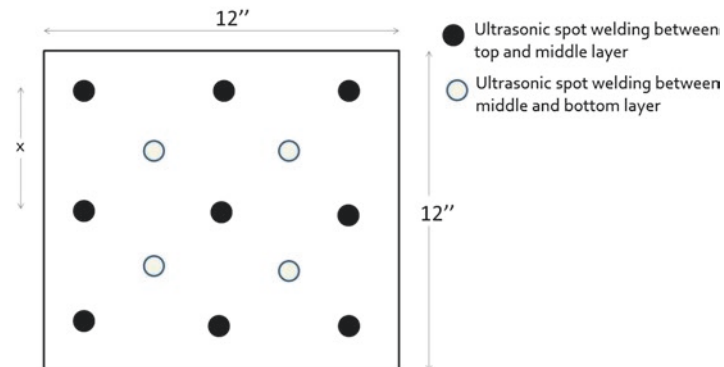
Ultrasonic spot weld placement for sandwich structure fabrication
